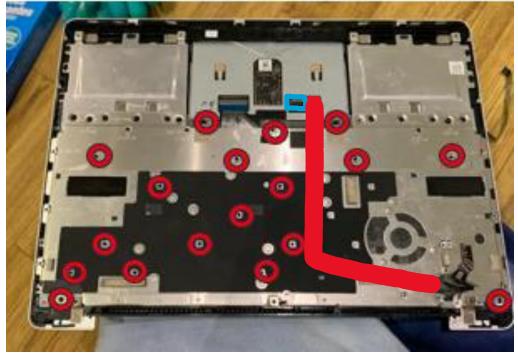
Back of keyboard/trackpad shell with all screws outlined in red, and two connections outlined in red and blue
